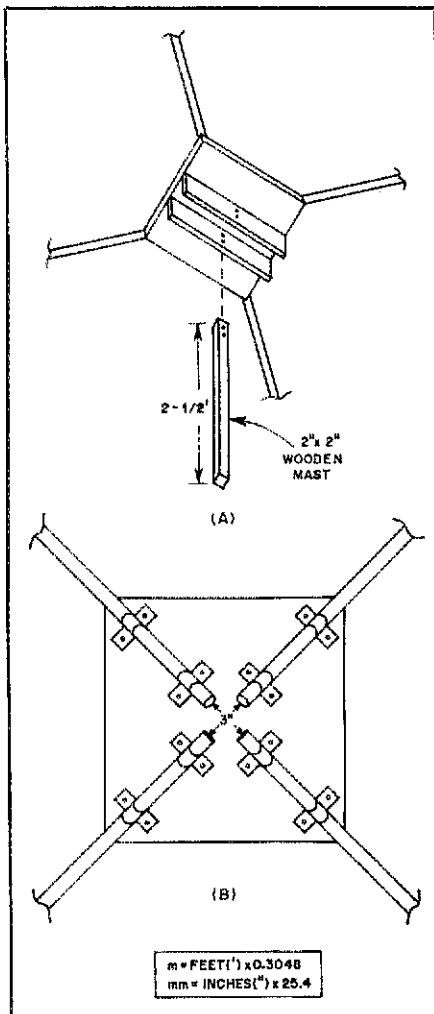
Details of the hub assembly. A shows the bottom view, and B details the top assembly.
